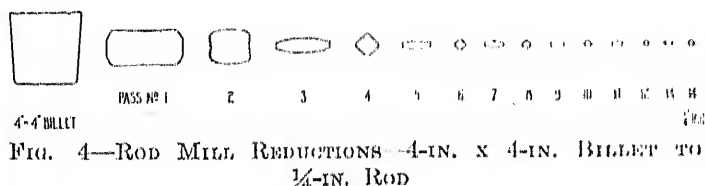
ROD MILL REDUCTIONS—4-IN. X 4-IN. BILLET TO $\frac{1}{4}$ -IN. ROD
